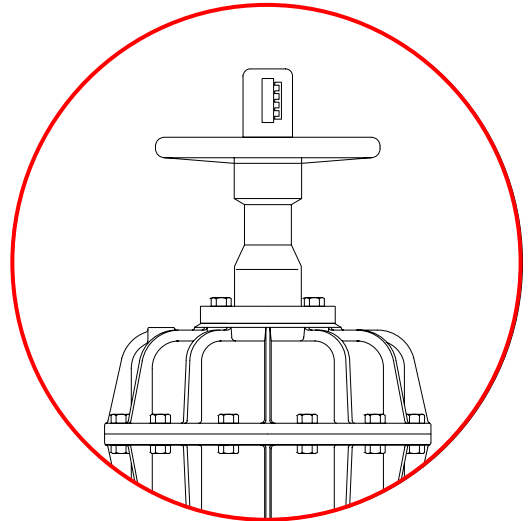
Top Mounted Manual Handwheel Unit (T-0,T-1).
